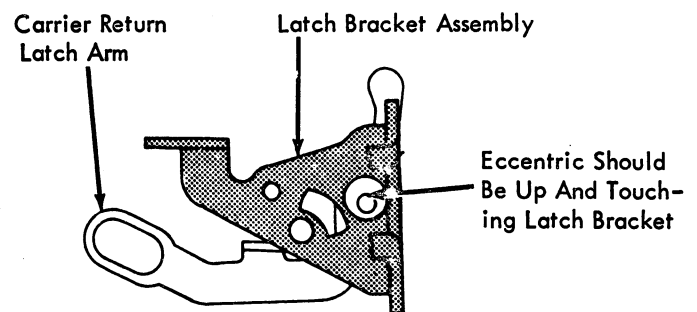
Pivot Pin Eccentric (Early Level Machines Only)
